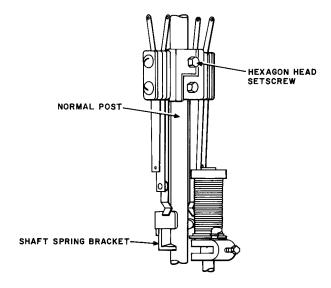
Normal Post Spring Assembly Operated by Shaft Spring Bracket
